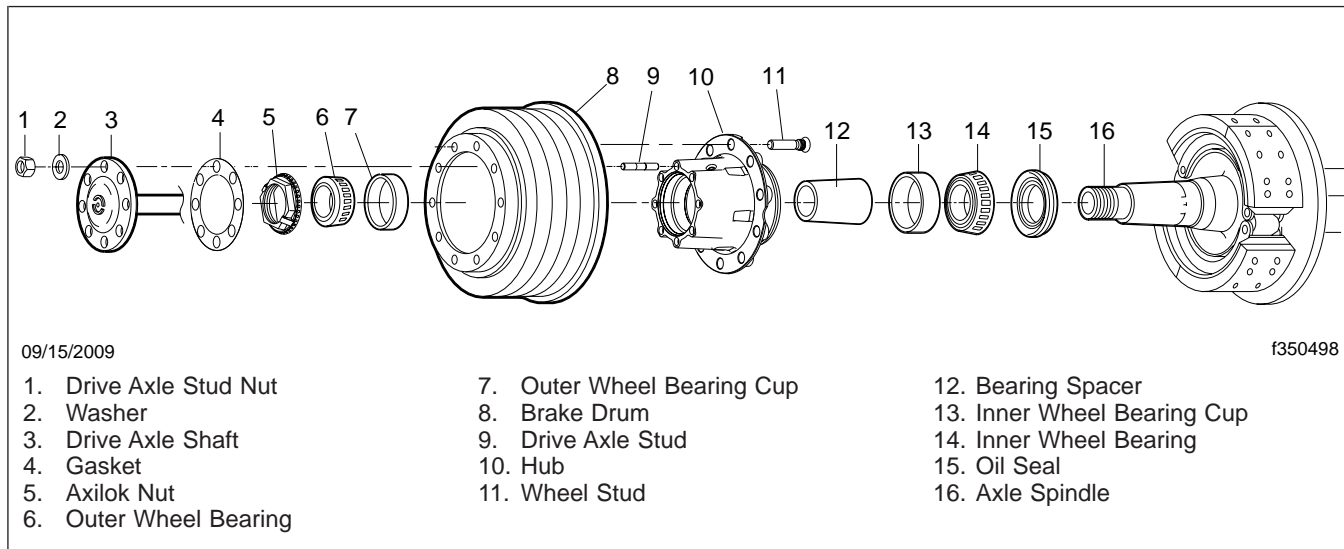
, Typical Wheel End Assembly, Drive Axle with Drum Brakes
